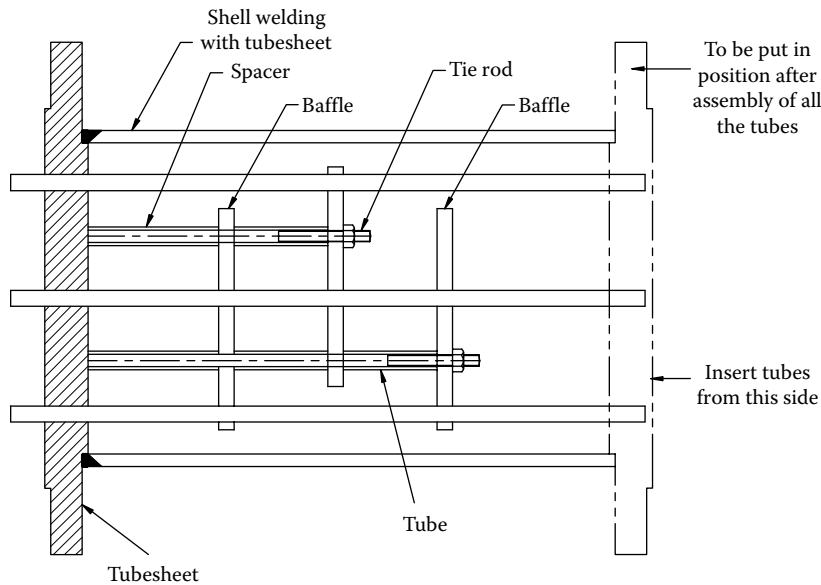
Scheme for assembly of tube bundle inside the shell.
